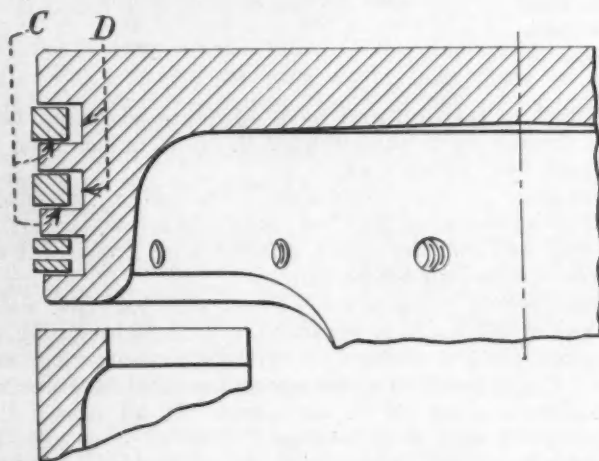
A CONVENTIONAL PISTON-HEAD WITH RECTANGULAR RINGS
